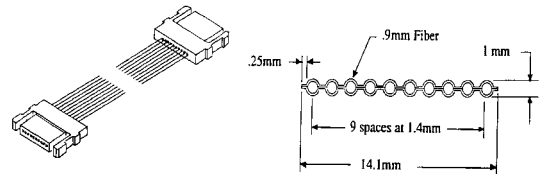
Schematic view of a 10-fiber optical cable assembly.
